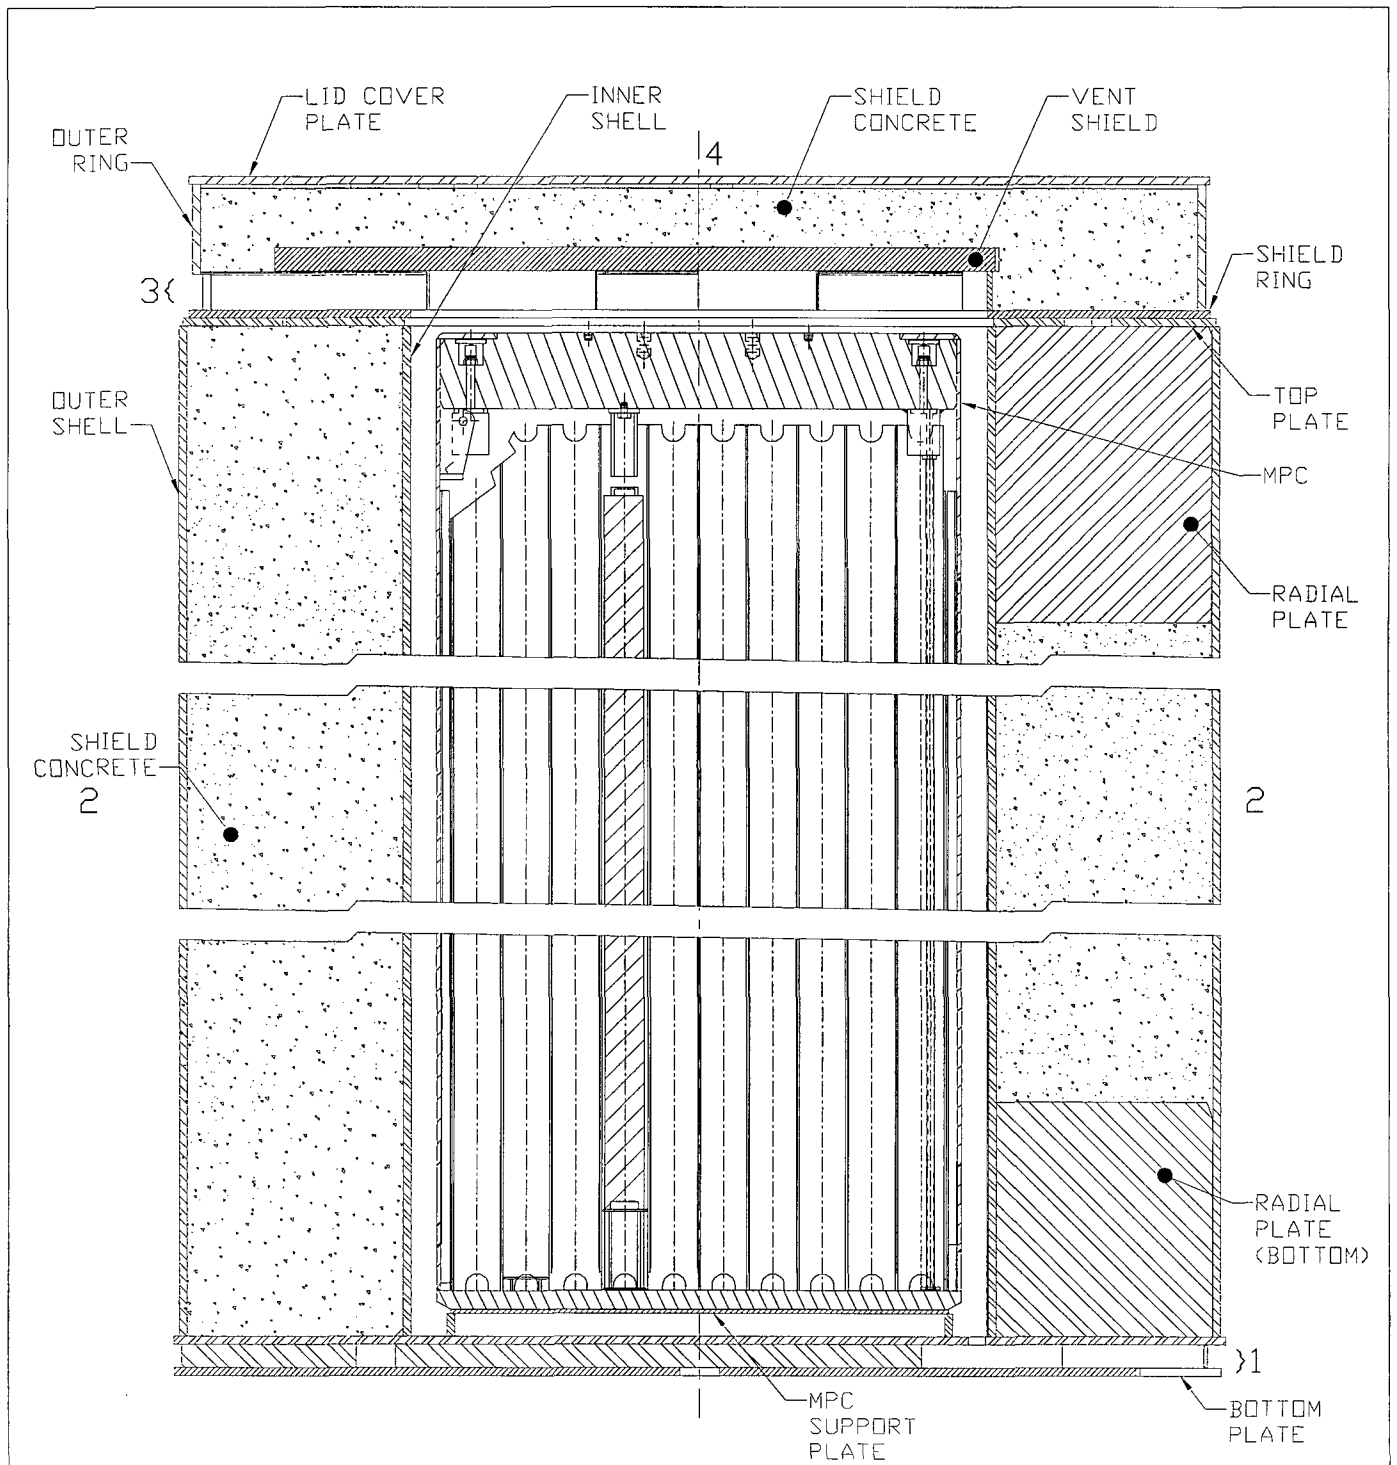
; HI-STORM 100S VERSION B OVERPACK CROSS SECTIONAL ELEVATION VIEW WITH DOSE POINT LOCATION
